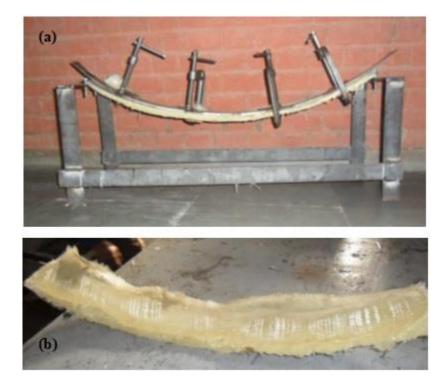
(a) mould setup for hand lay-up process, (b) manufactured composite leaf spring (Source: Gebremeskel 2013)
